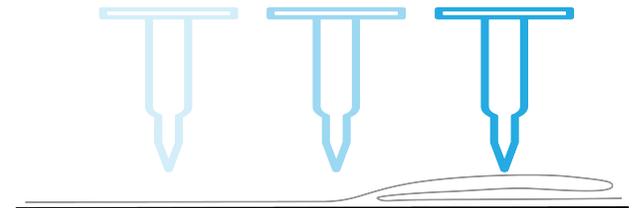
Heated iron going over mountain on 4 layers of fabric. This seals only top two layers.
